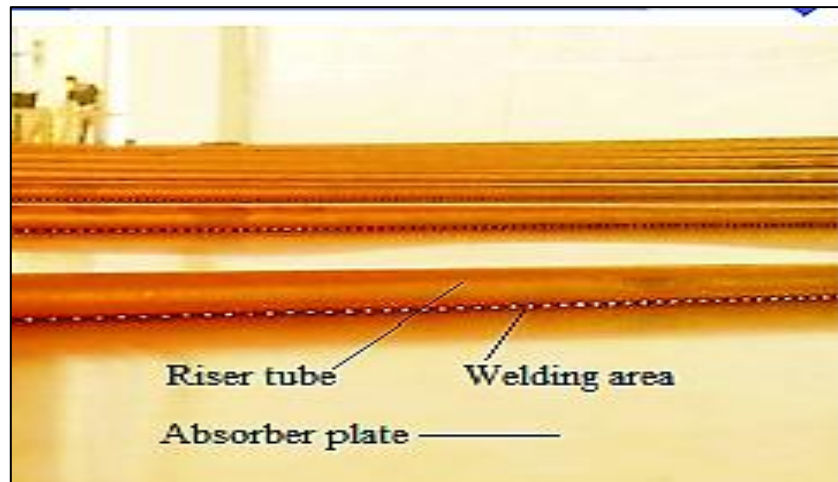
shows riser tubes fixed on the absorber plate by laser welding
